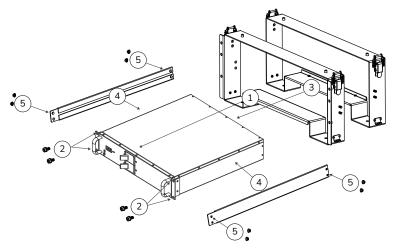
Battery Module Combiner Quick Stack Rack Assembly
